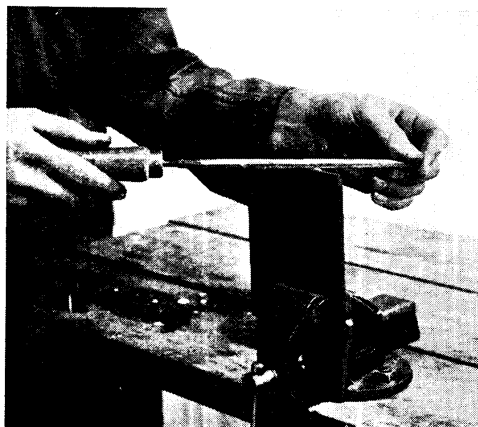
Edges of the ebonite panel are filed after cutting to make them flat and true. Note how the file is held. Too great a pressure should not be applied, and the accuracy of the filing should be checked with a set square
